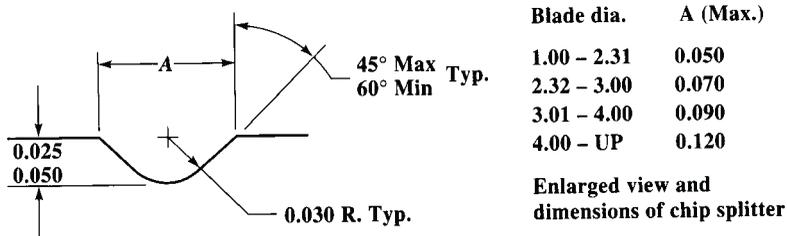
Spade Drill Chip Splitter Dimensions in Inches
